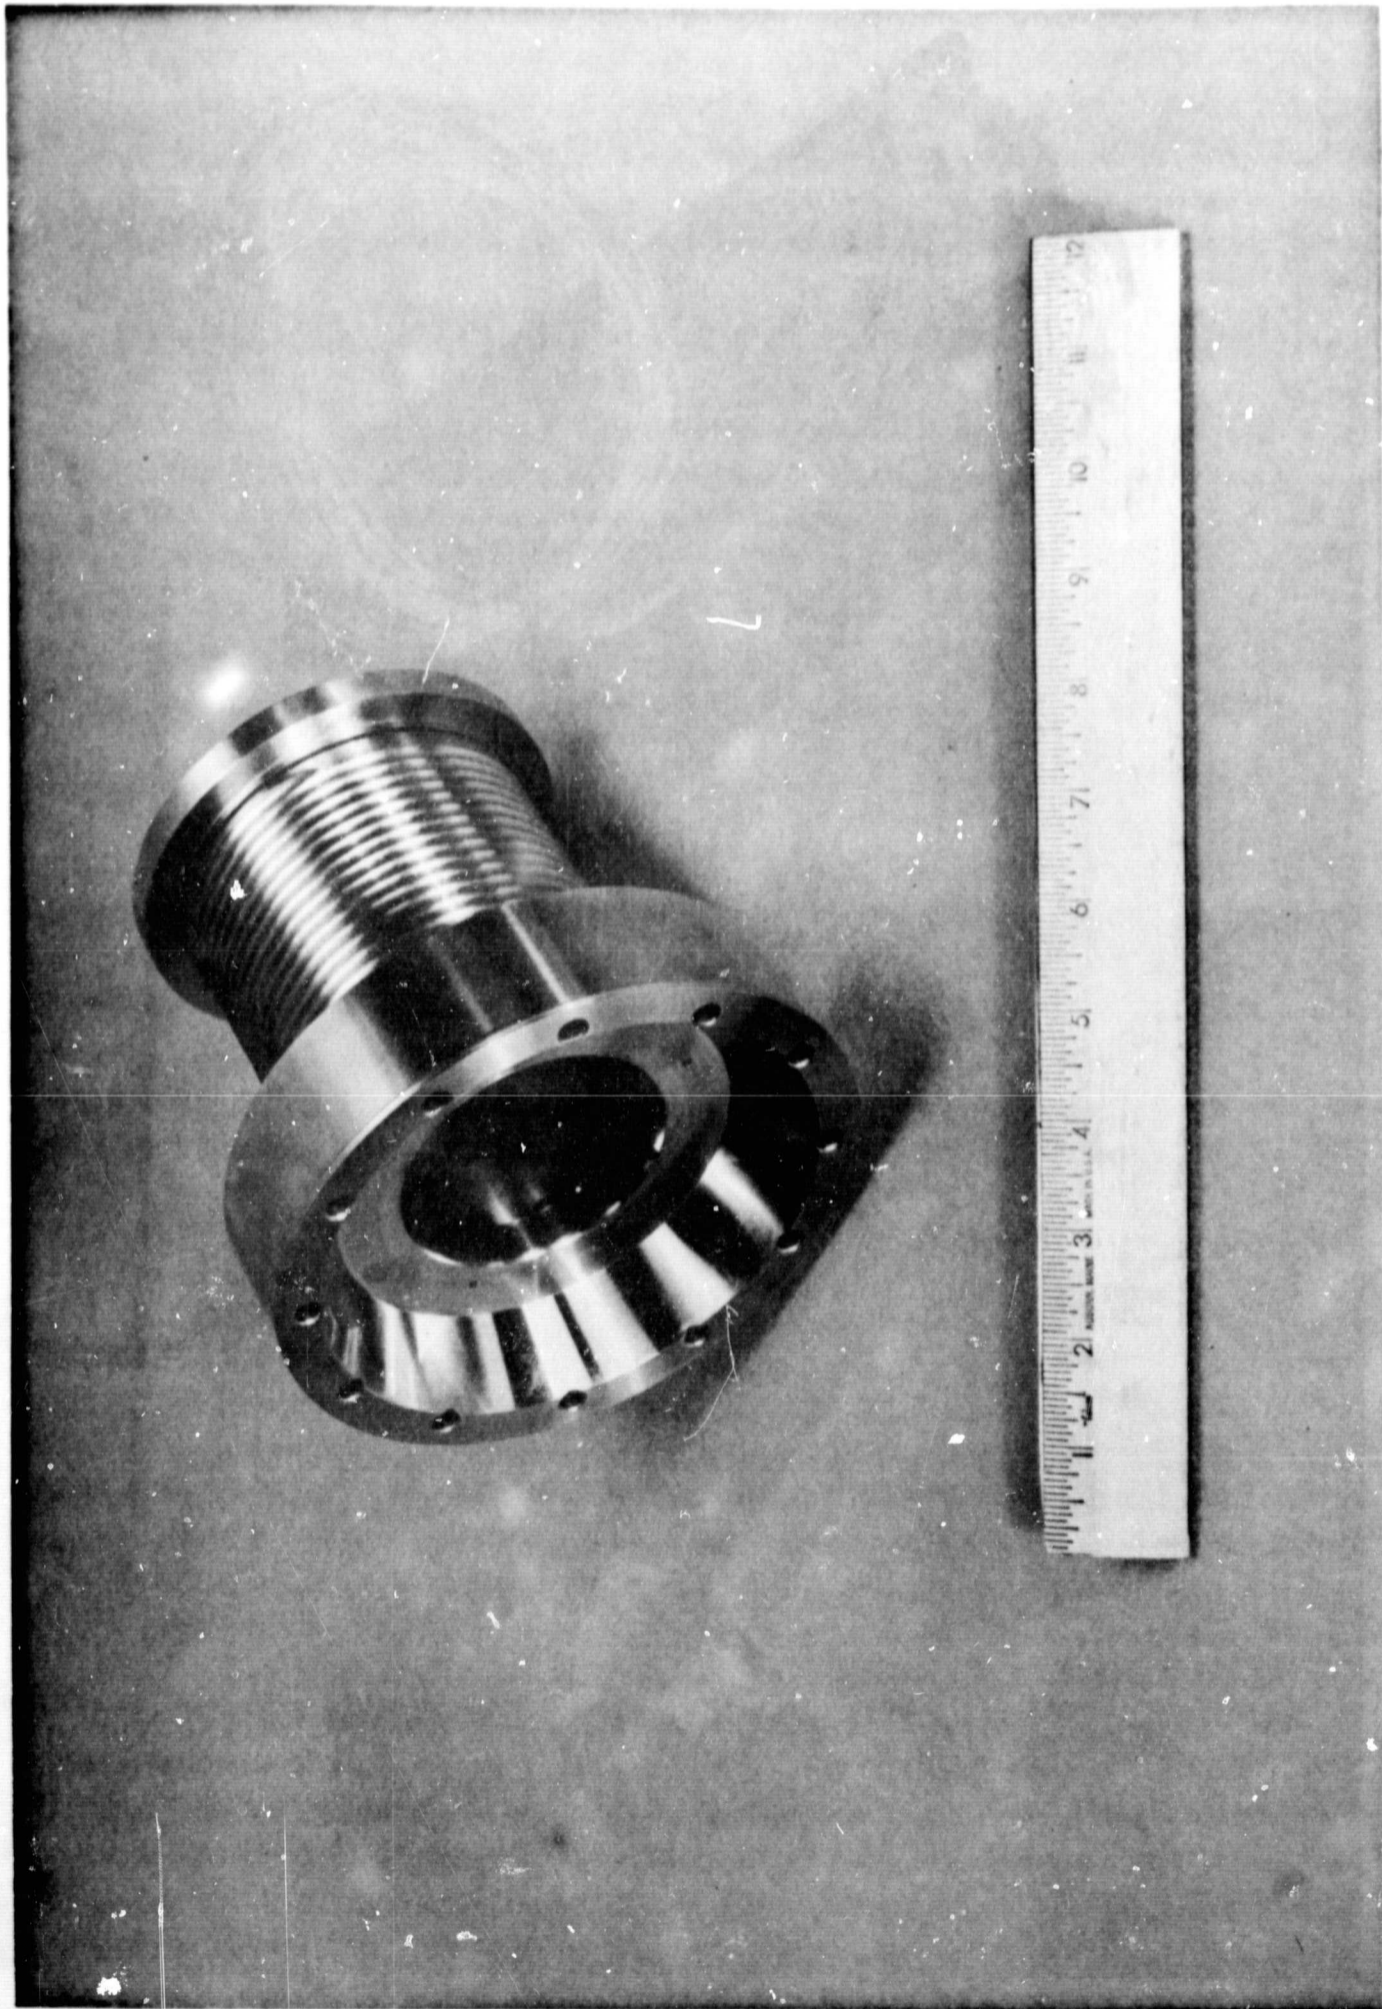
PHOTOGRAPH OF MACHINED EVAPORATOR SECTION
